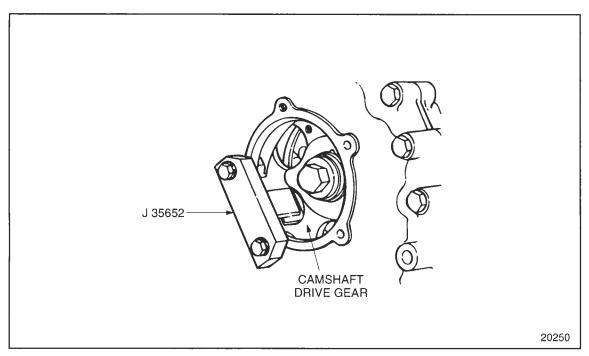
Camshaft Drive Gear Torque Holding Tool Installation
